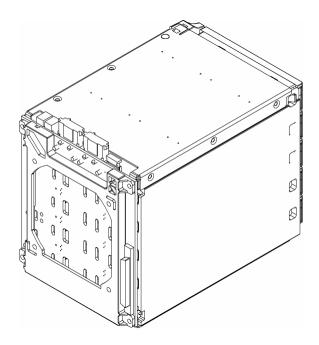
Hot-swap Drive Bay, Rear Isometric View
